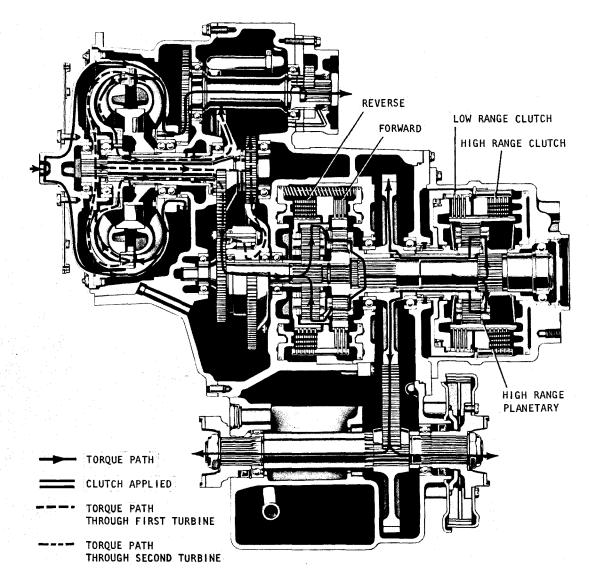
Reverse-2 torque path (TRT 2221-1, TRT 2421-1 transmission)
